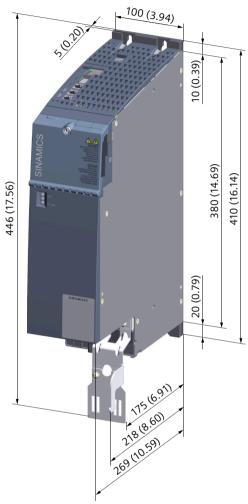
Dimension drawing of Smart Line Modules 16 kW and 24 kW, all dimensions in mm and (inch)
